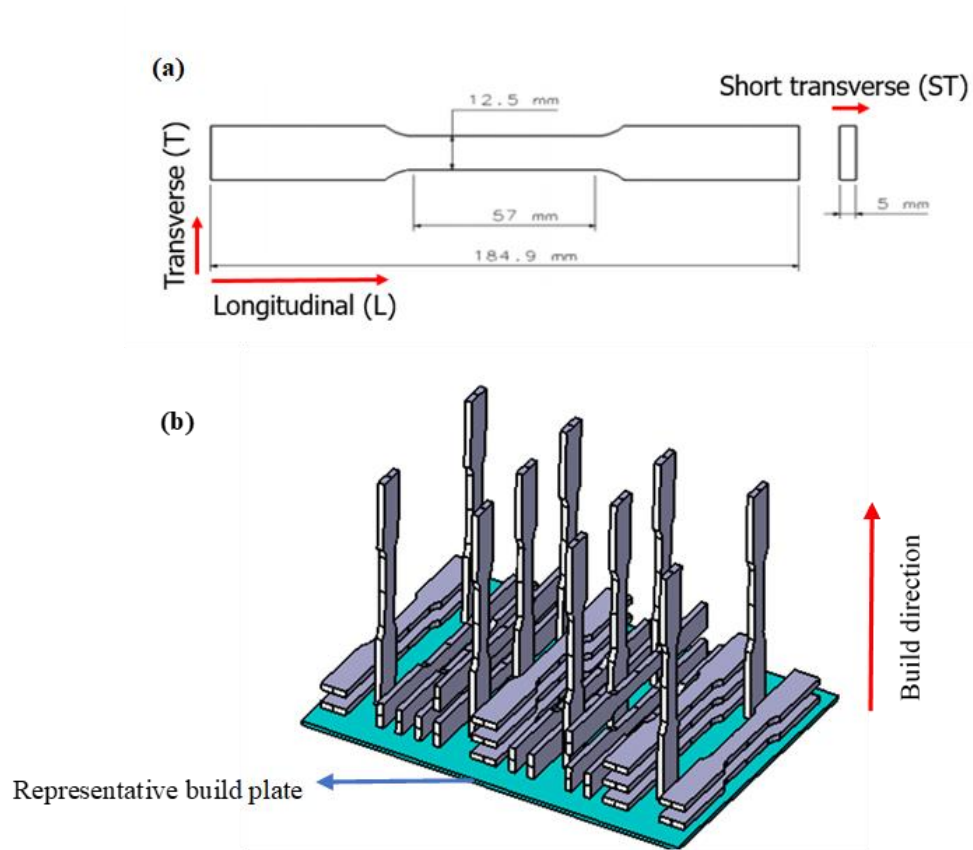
Tensile test specimen dimensions and build directions. (a) Specimen dimensions according to ASTM E8 and build directions (b) Specimen manufacturing layout in same build tank.
